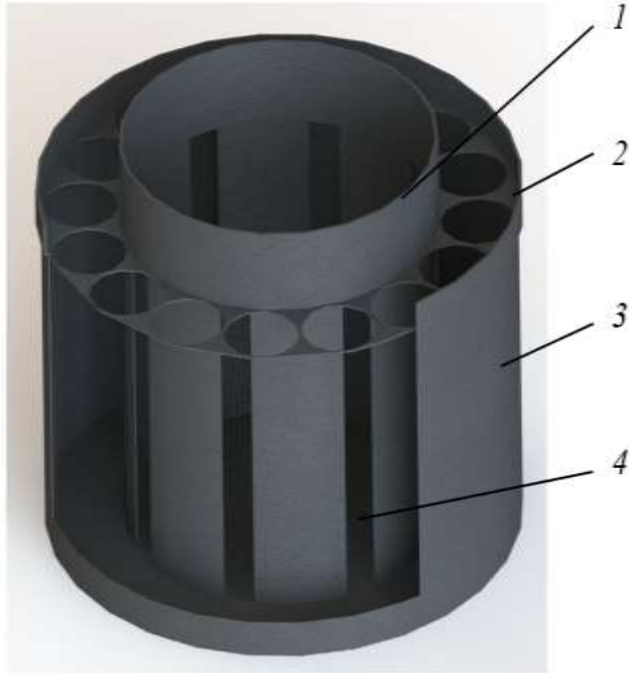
Three-dimensional model of centrifugal separator with coaxially arranged pipes: 1 - inlet pipe, 2 - ring with holes, 3 - housing of centrifugal separator, 4 - slots
